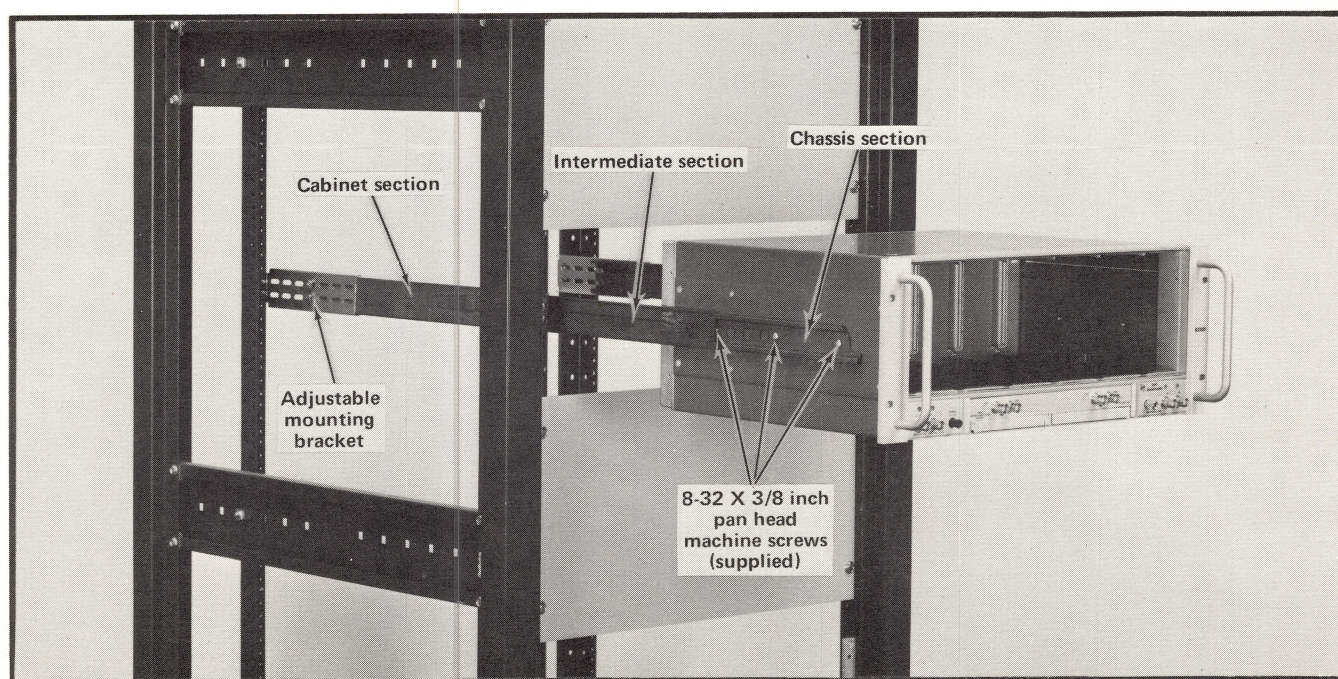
Instrument mounted in rack equipped with slide-out tracks.
